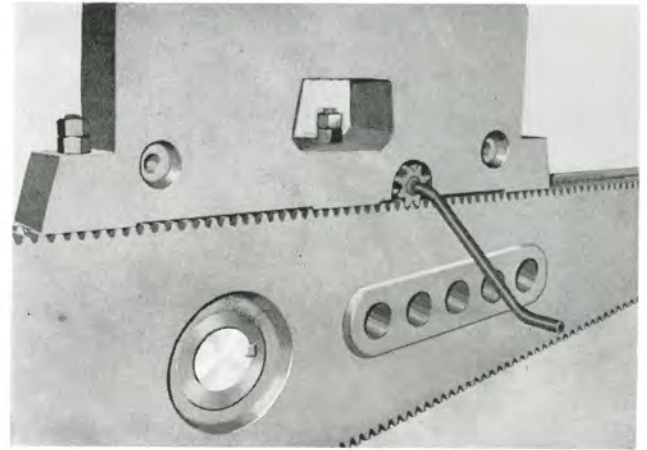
New removable pinion (with crank handle attached) is used to adjust all counterweights.
